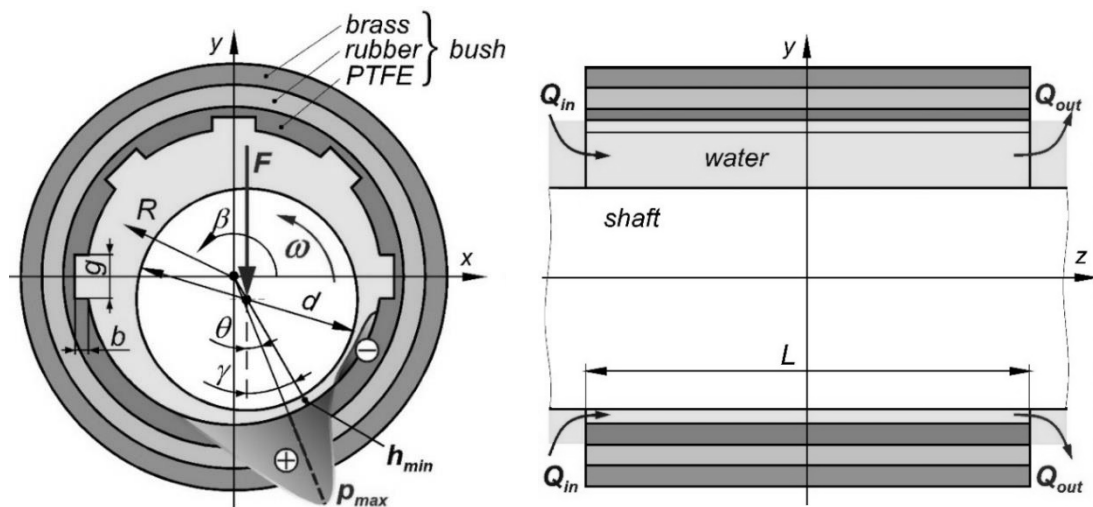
Schematic operation of the water-lubricated journal bearing with axial grooves.
